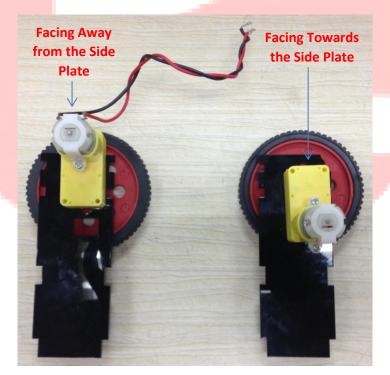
Both the BO Motors and Wheels are fixed to the Side Plates
